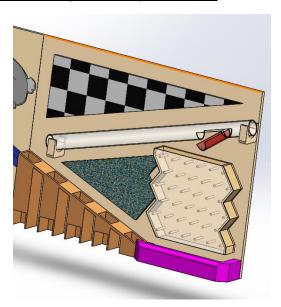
Our CAD Drawing of Toddler Section which includes translucent full tube with a hinged door, Plinko, counting ball ramp, textures, and ball collection.
